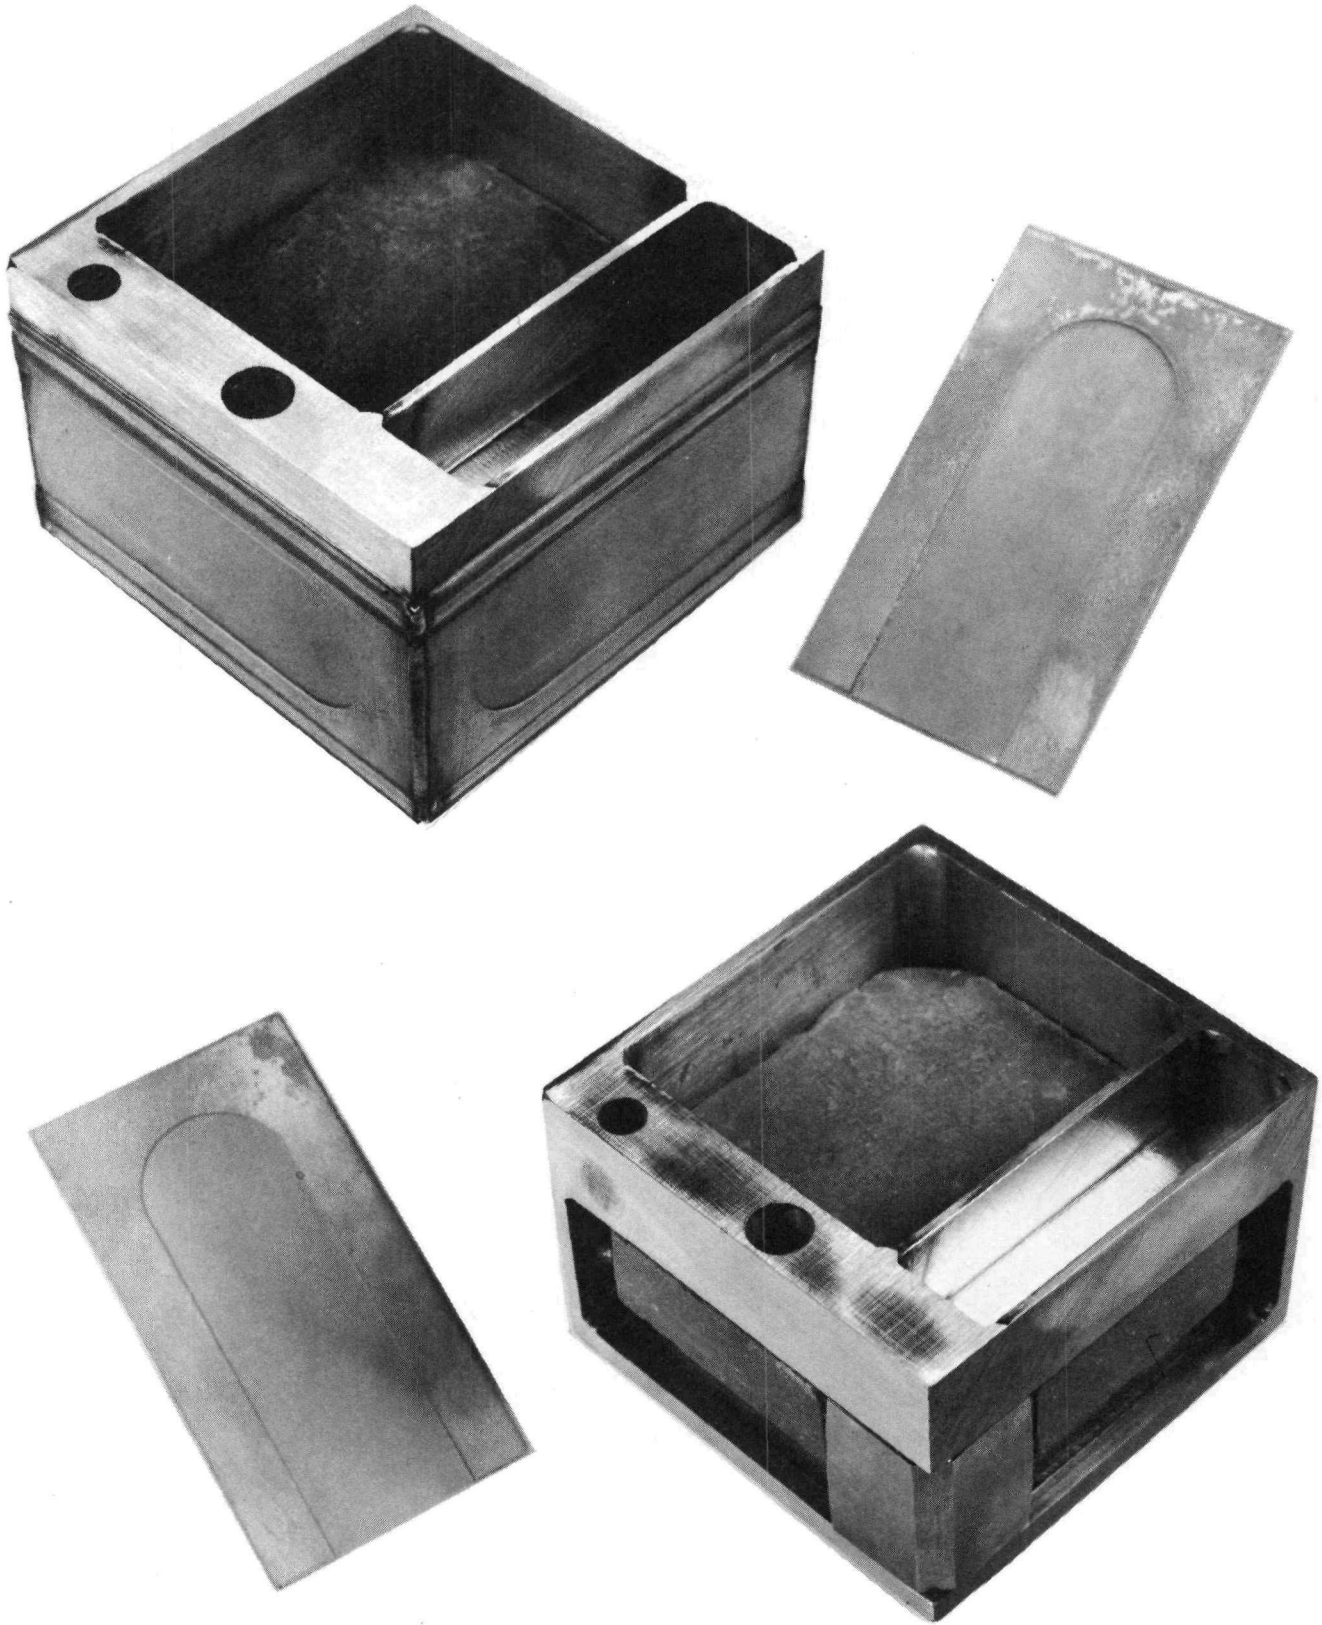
WELD SAMPLES FOR SIDE SKIN DESIGN MODIFICATION
